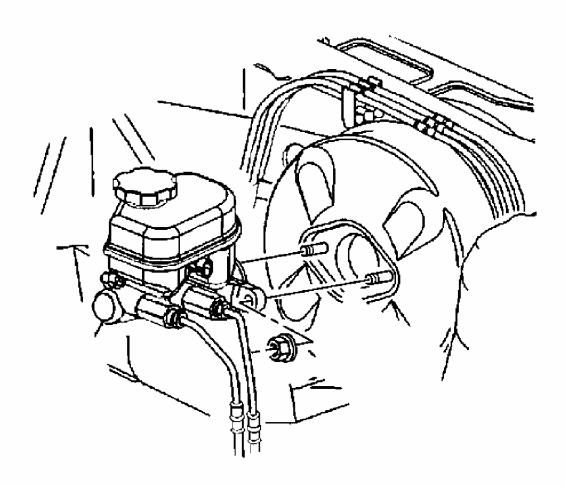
Removing & Installing Master Cylinder Courtesy of GENERAL MOTORS CORP.
